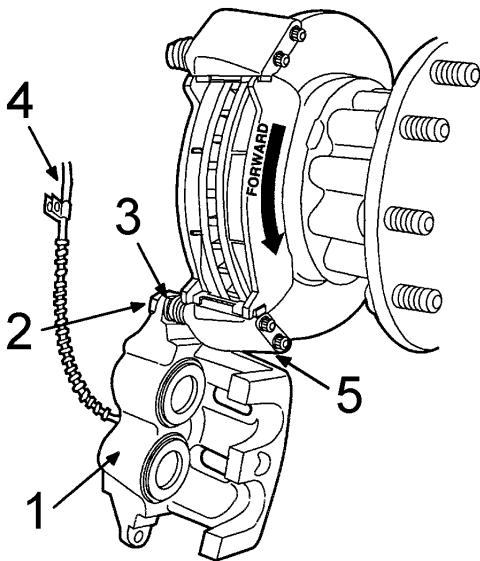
Rotate Caliper Closed About Lower Hex Mounting Bolt and Guide Pin
